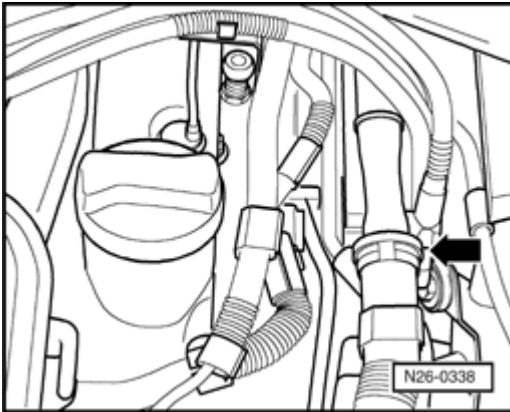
Locating Pressure Hose To Combi-Valve At Connection
